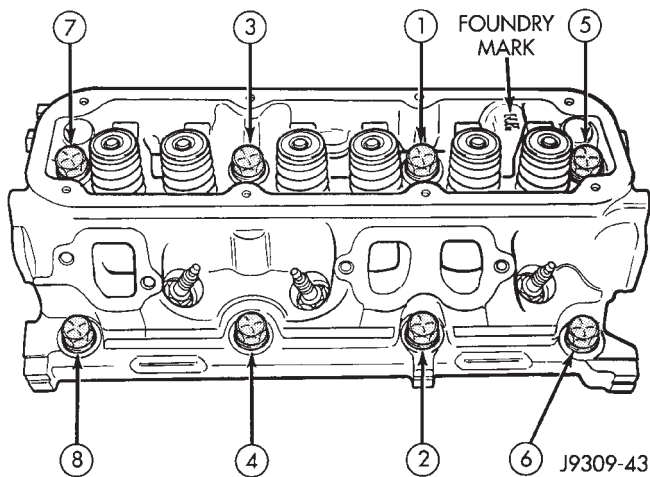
Cylinder Head Bolt -Tightening Sequence
